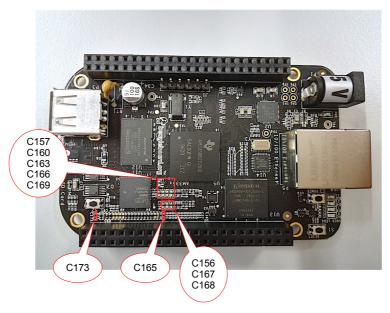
Marked capacitors are removed/disassembled from the Beagle Bone board top side
